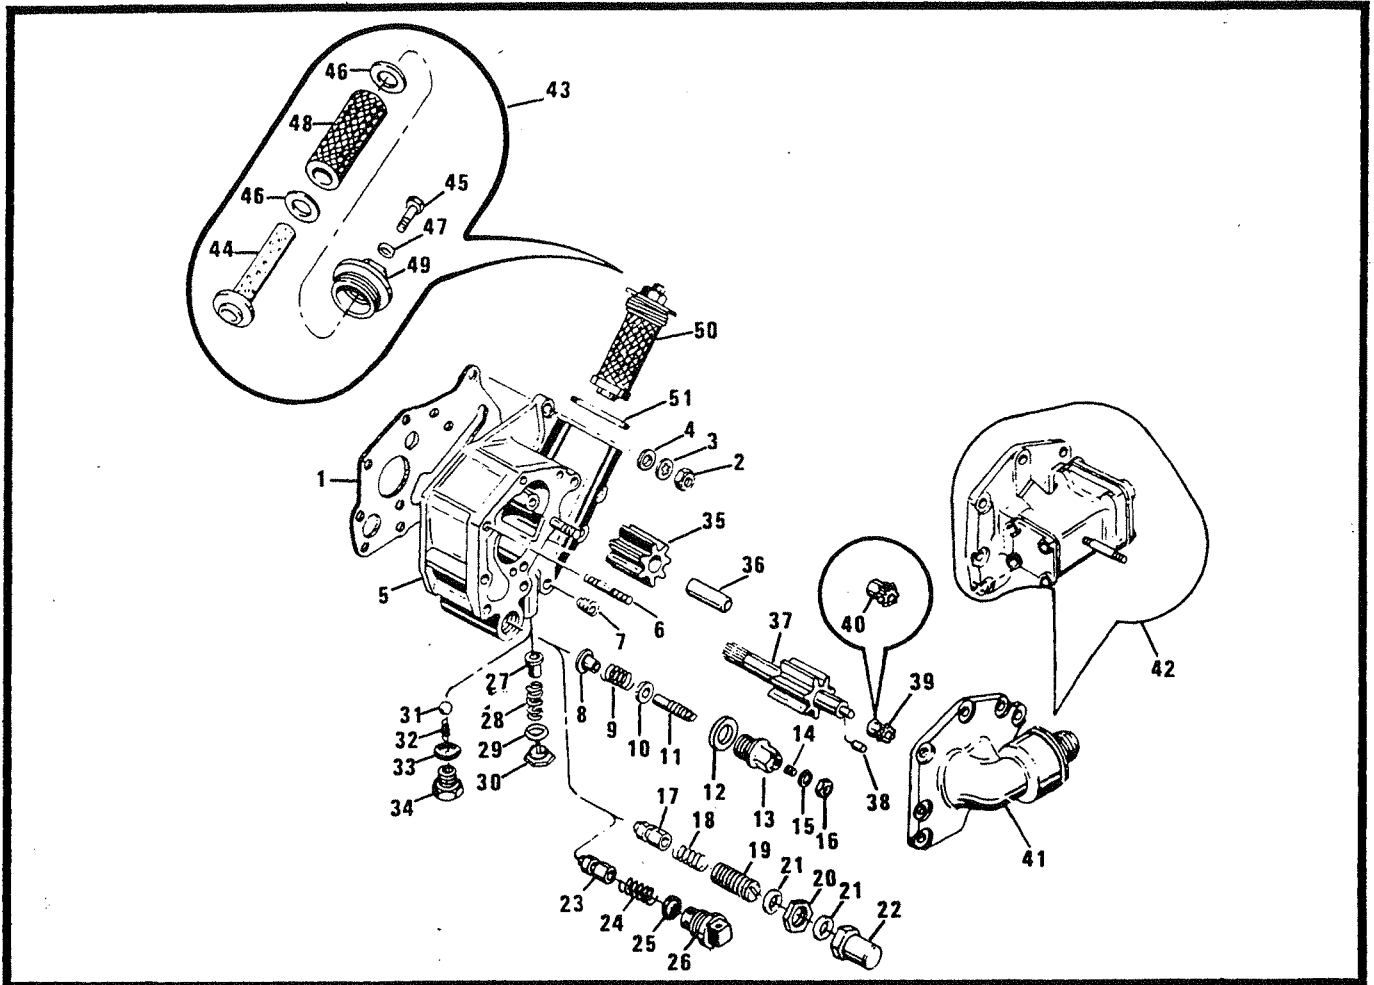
A. OIL PUMP ASSEMBLY.
